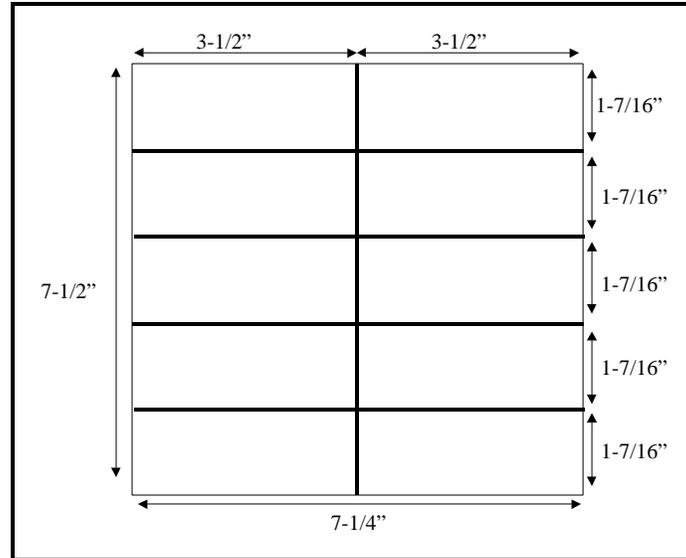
Ripsaw Sawing Pattern from Processing Hardwood Cants into Pallet Parts for Mill 23
